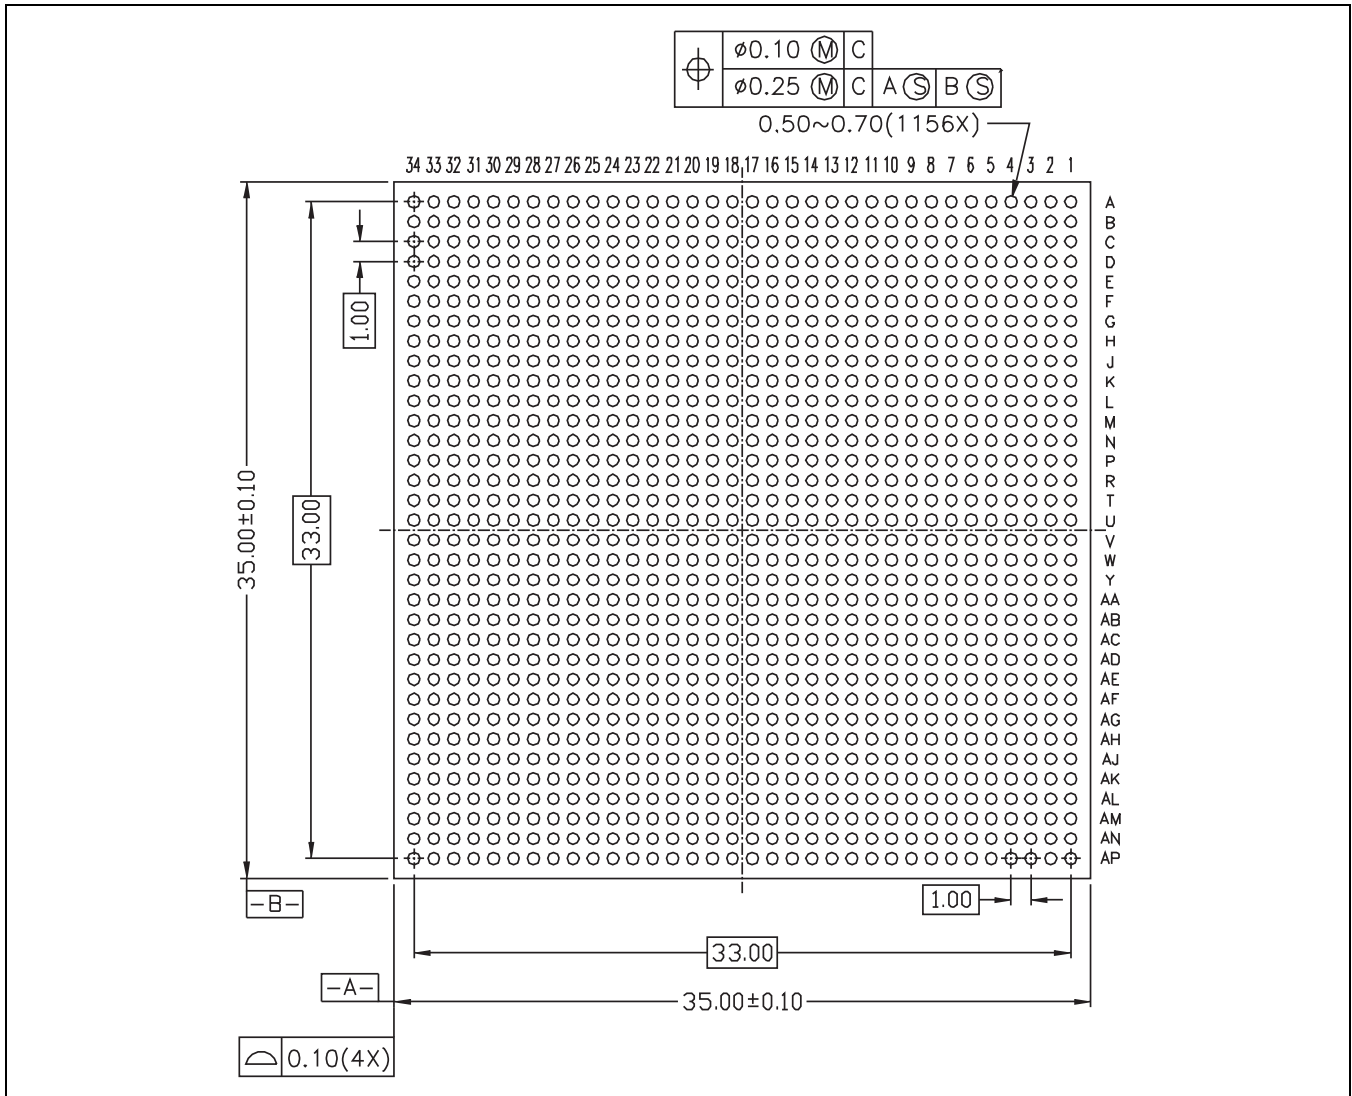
M21131/M21151 (-22/-23/-24) Bottom View of Package (in mm)
